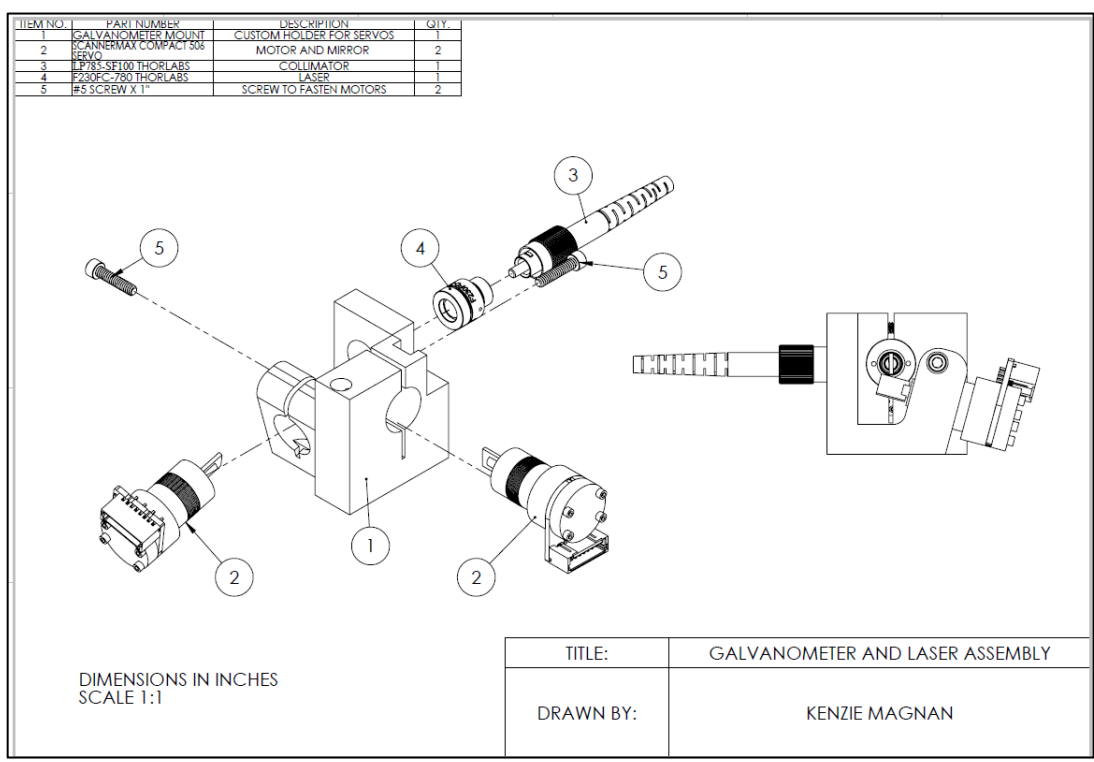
Technical Drawing of Laser, Collimator, and Galvanometer Assembly
